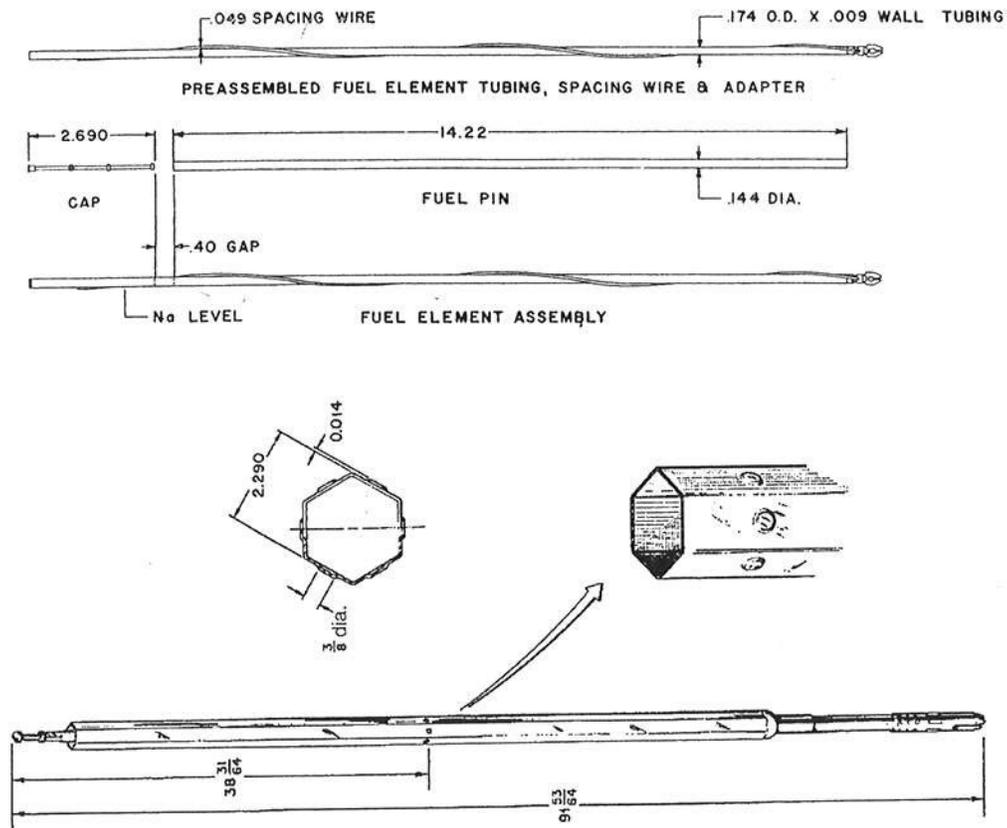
Spacers. Assembly at top illustrates the wire spacer around each of 91 fuel pins in a subassembly. Below, the hexagonal tube containing the pins shows spacer buttons on each face of the tube. Source: Koch, Monson, "Construction Design," p. 327; and Koch, *EBR-II*, p. 2-5.
